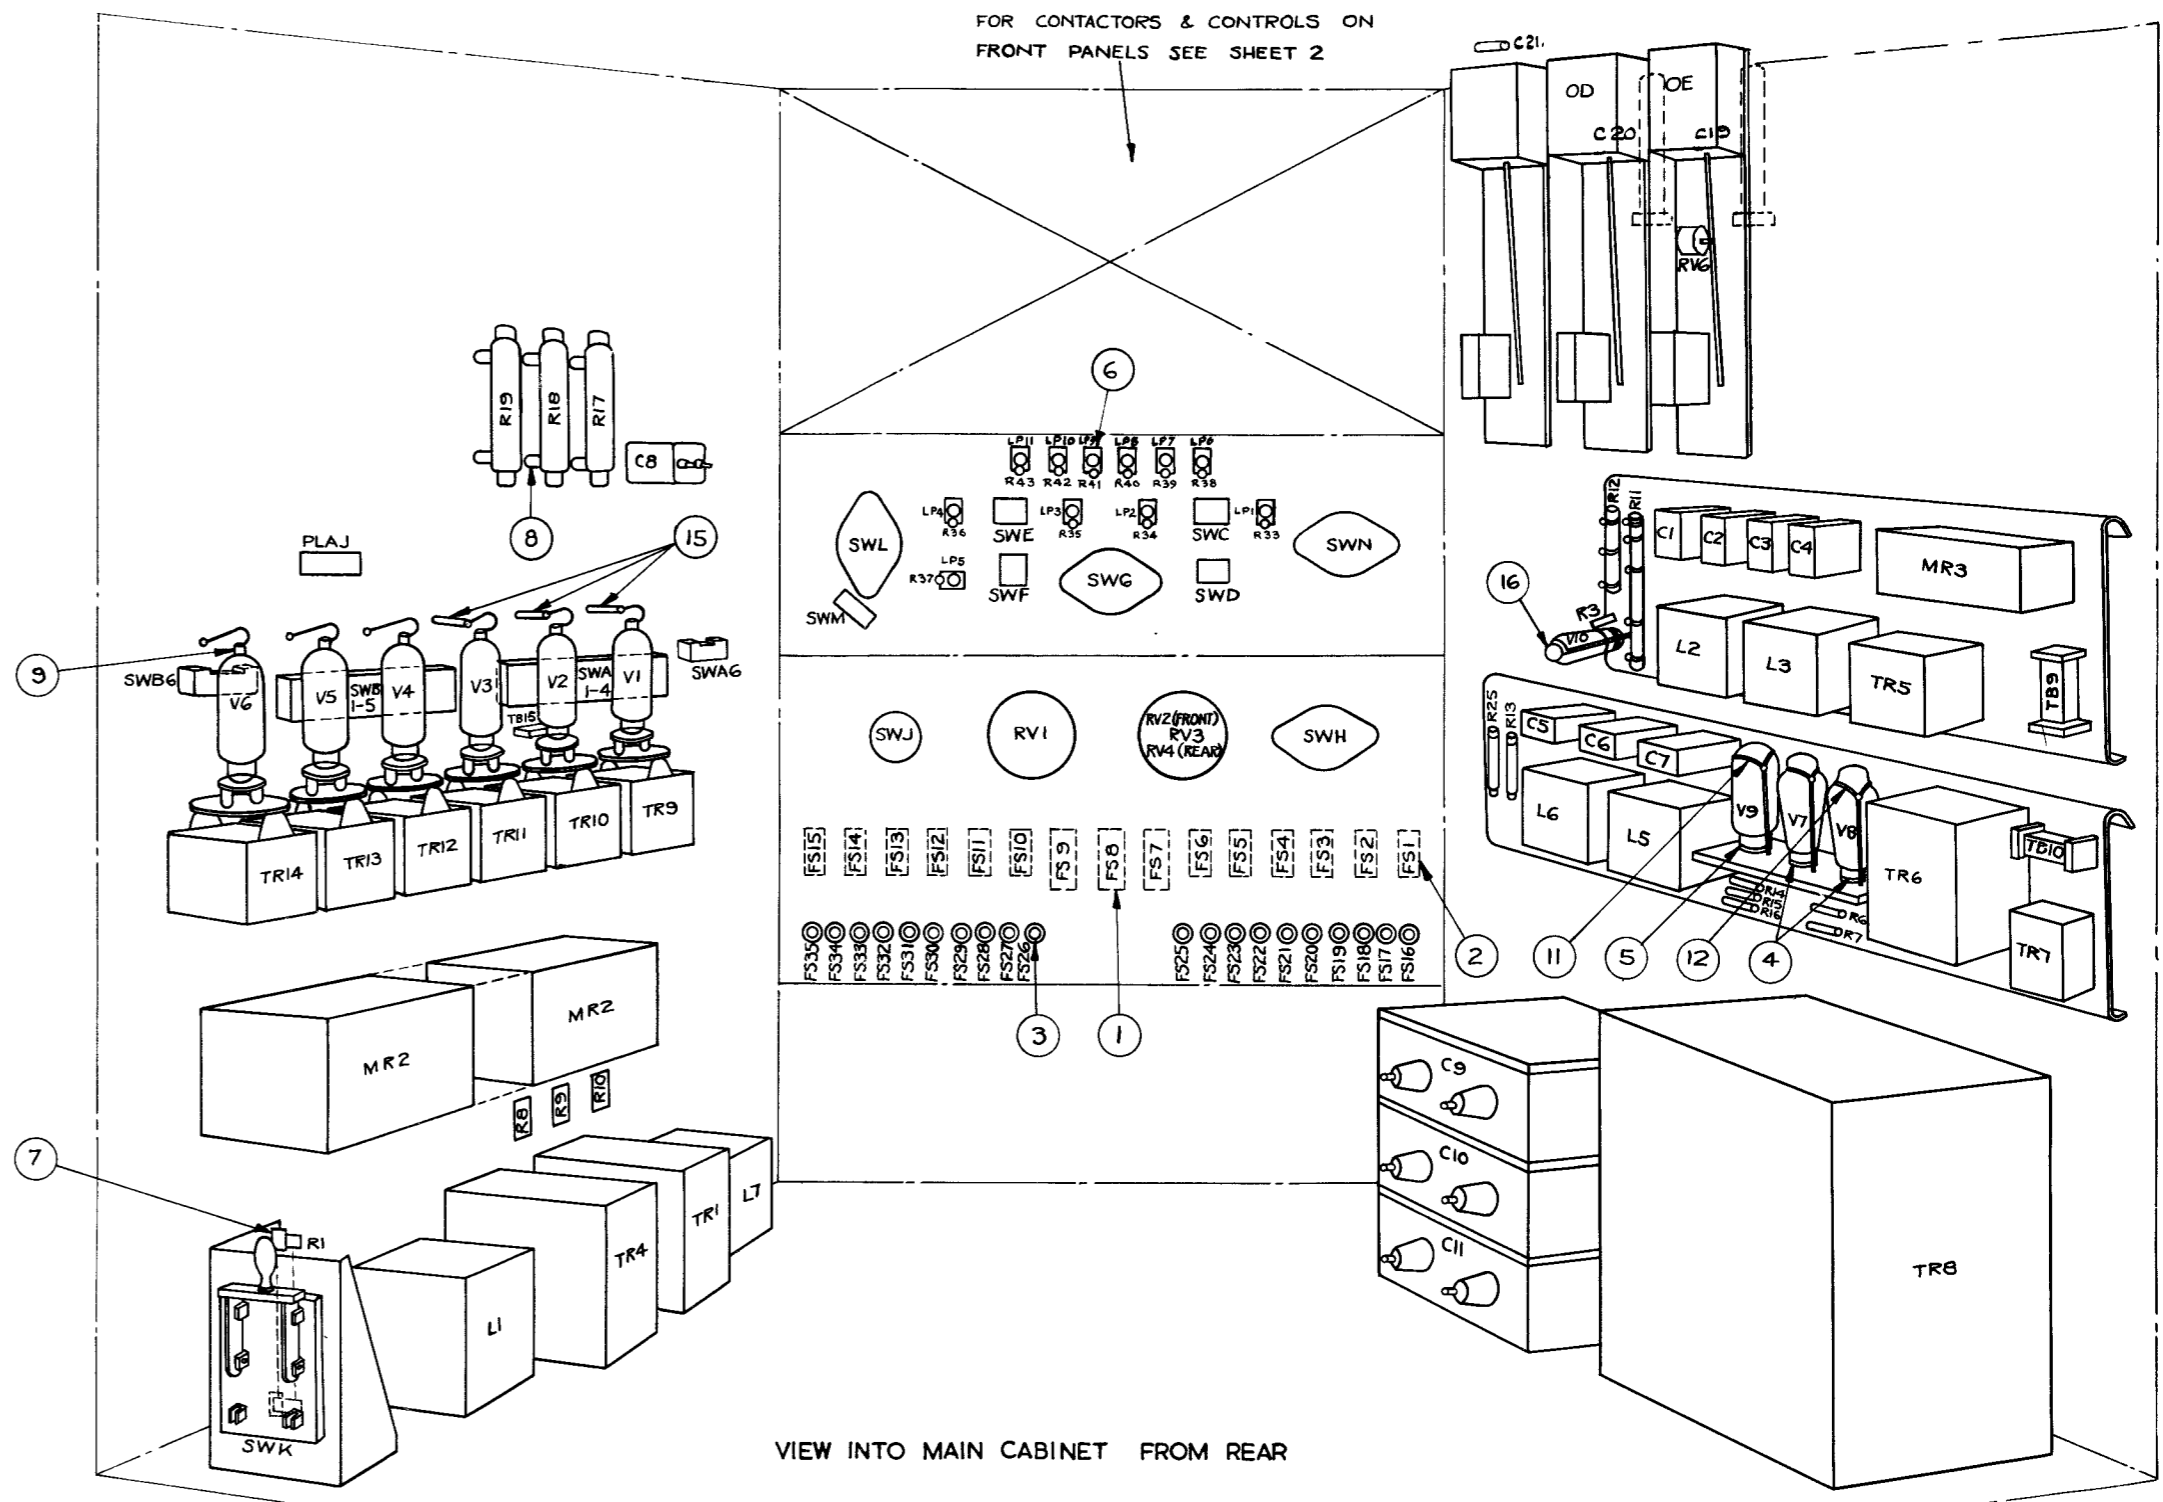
A(a) PART VIEW OF R.C.U. SHOWING
